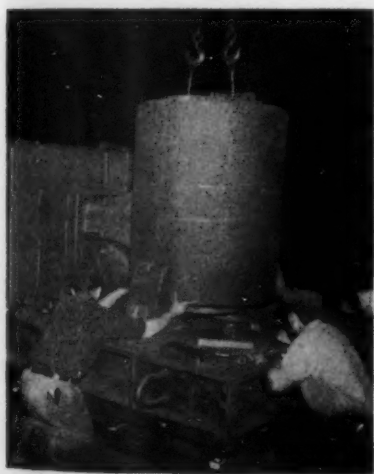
SETTING CYLINDER DIAMETER CORE.
